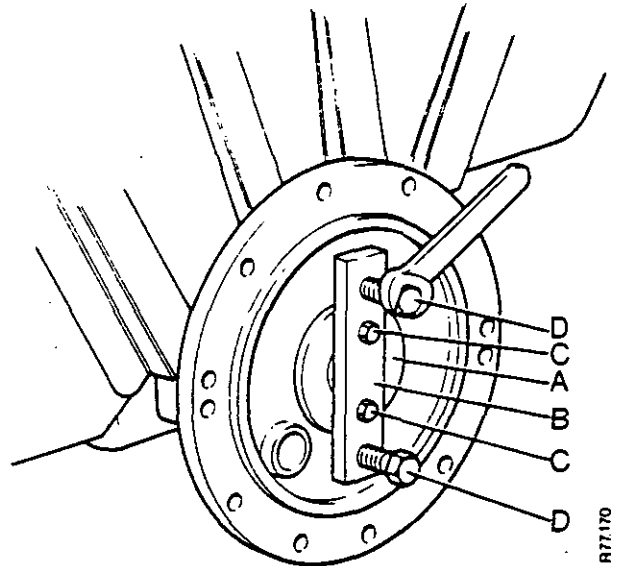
REMOVING OIL SEAL HOUSING FROM AXLE CASE
